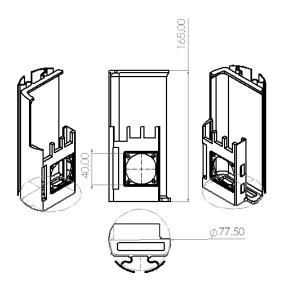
CAD Drawing of the Raspberry Pi case, designed to fit inside 3" PVC pipe. All measurements shown are in millimeters.
